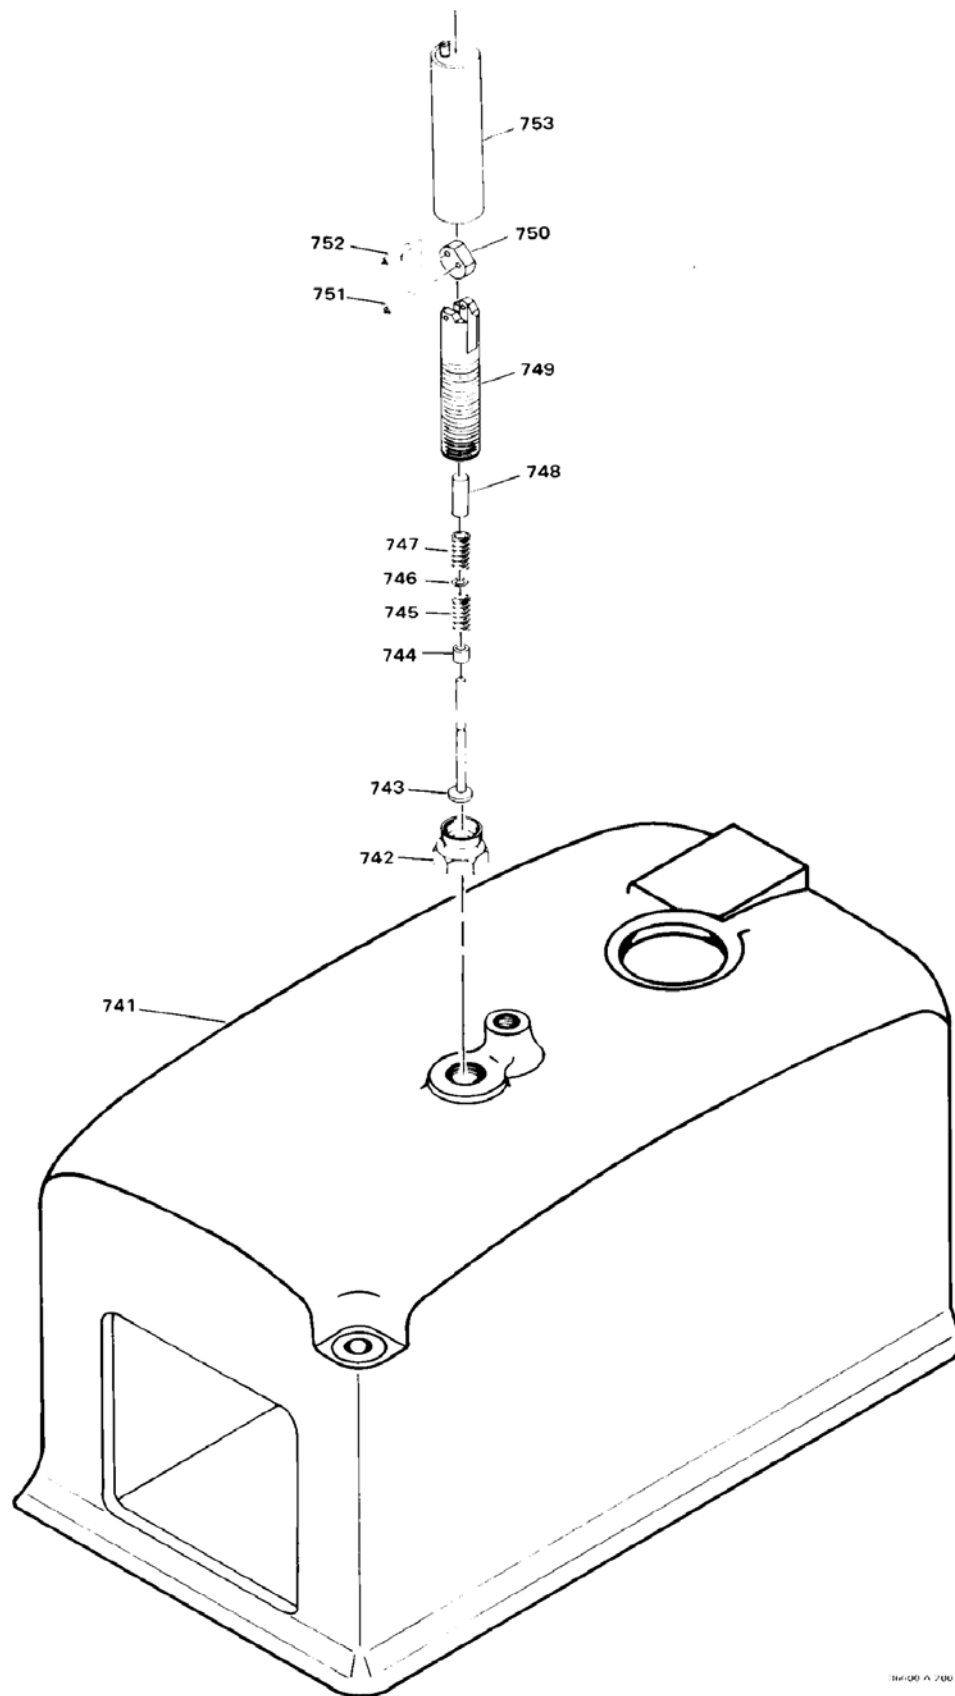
Exploded View of the Overspeed Trip Test Device
